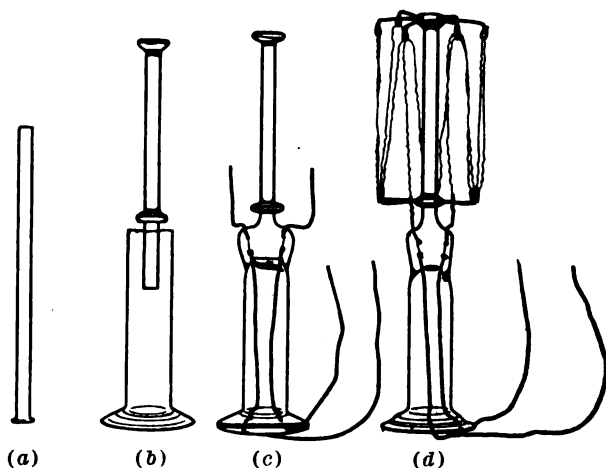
Illustrating the Manufacture of a Mazda Lamp. (a) Cane glass for hub. (b) Hub and stem tube. (c) Complete glass stem. (d) Completed mount.
